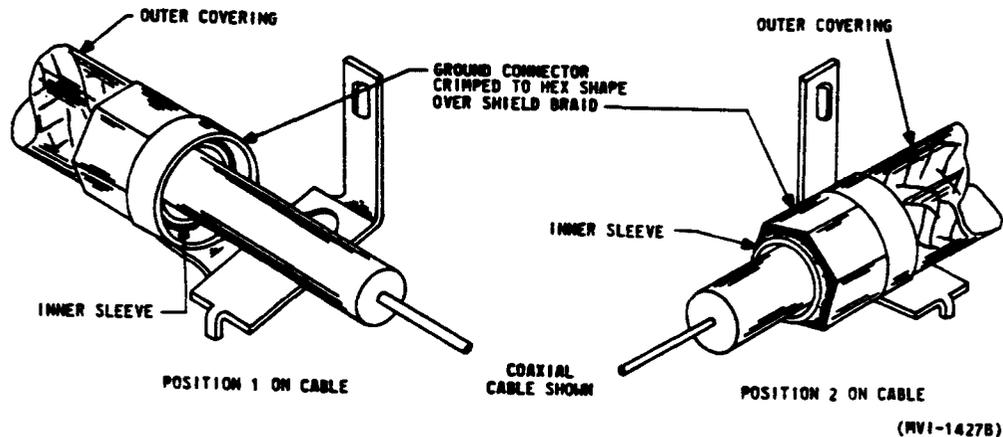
FLAG-TYPE SHIELD GROUND CONNECTOR
